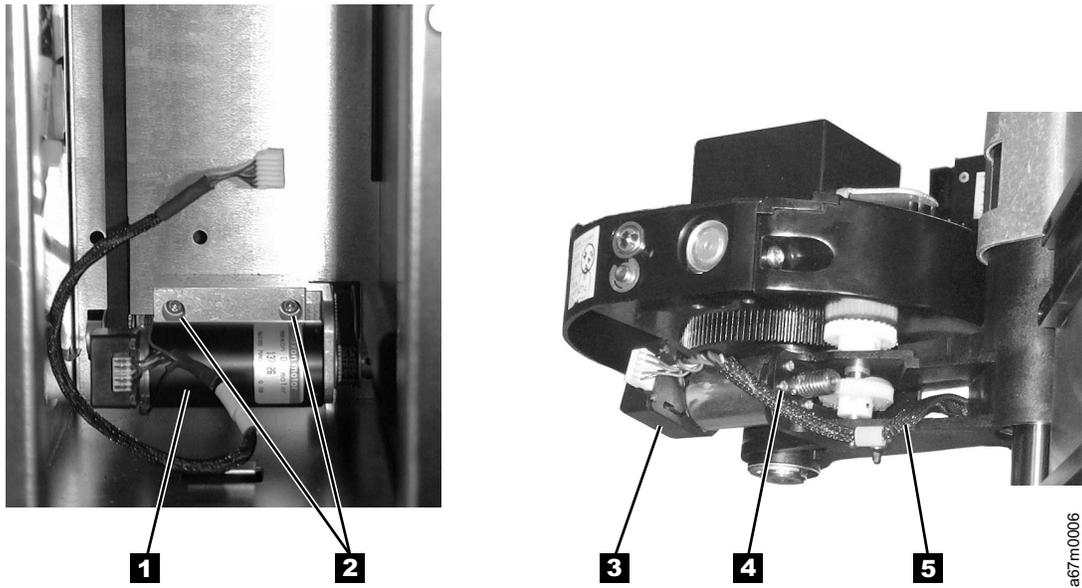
Y-Axis and Rotary-Axis Assembly
